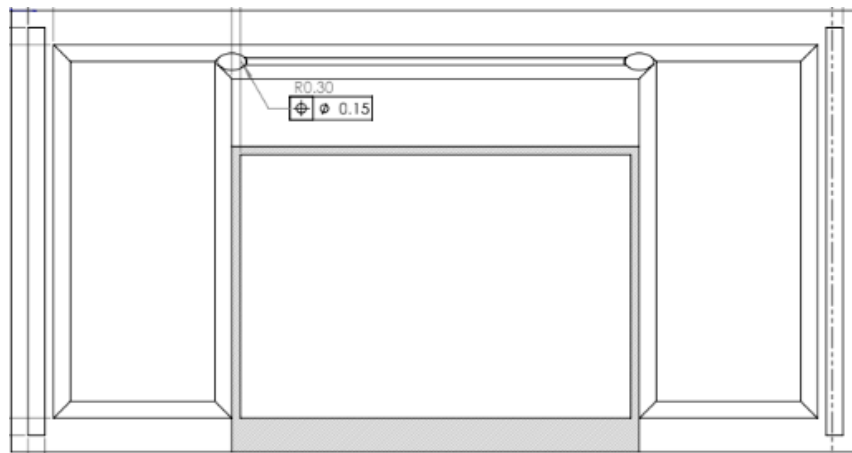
Elevated Platforms (No Drainage) Tabletop Design
